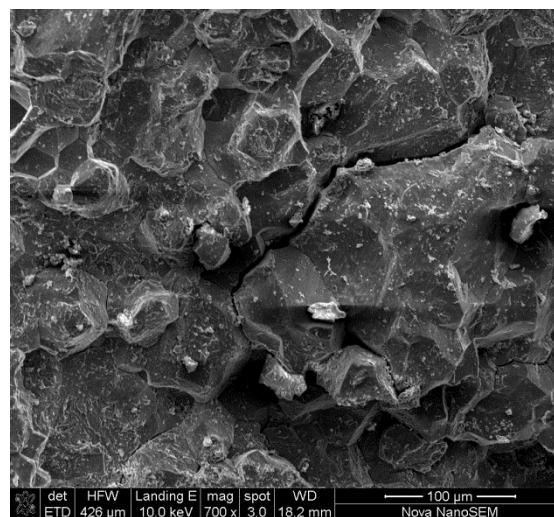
Fracture surface of 480°C temper WOL specimen at higher magnification, showing grain separation
